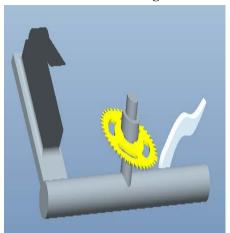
PRO E Design of Sprocket Connected assembly of to the Leg Steering System
